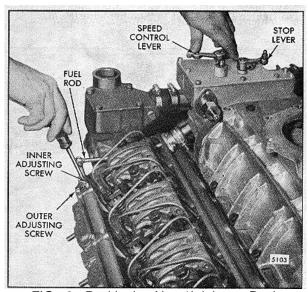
Positioning No. 1L injector Rack Control Lever (Two Screw Assembly)
